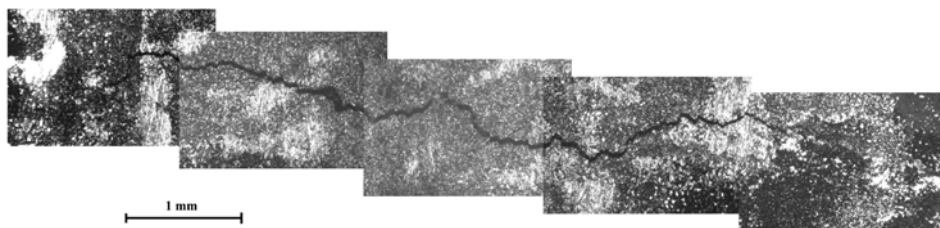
Surface breaking thermal fatigue crack (surface length ca. 6,5 mm) in an austenitic stainless steel plate.
